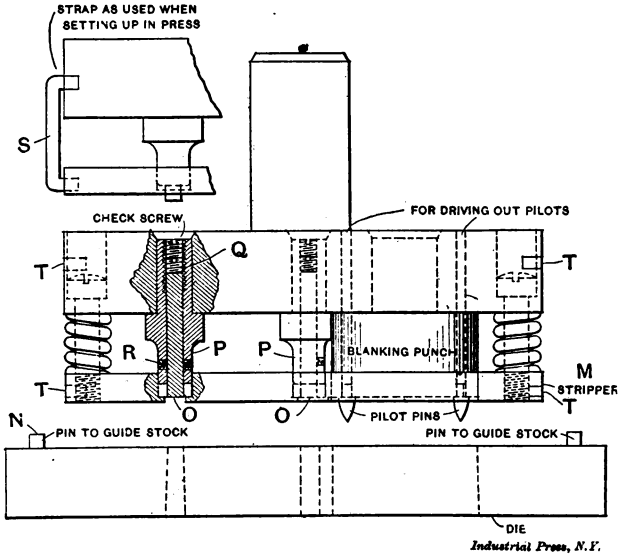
Die with Stripper Attached to Punch to Flatten Stock.
